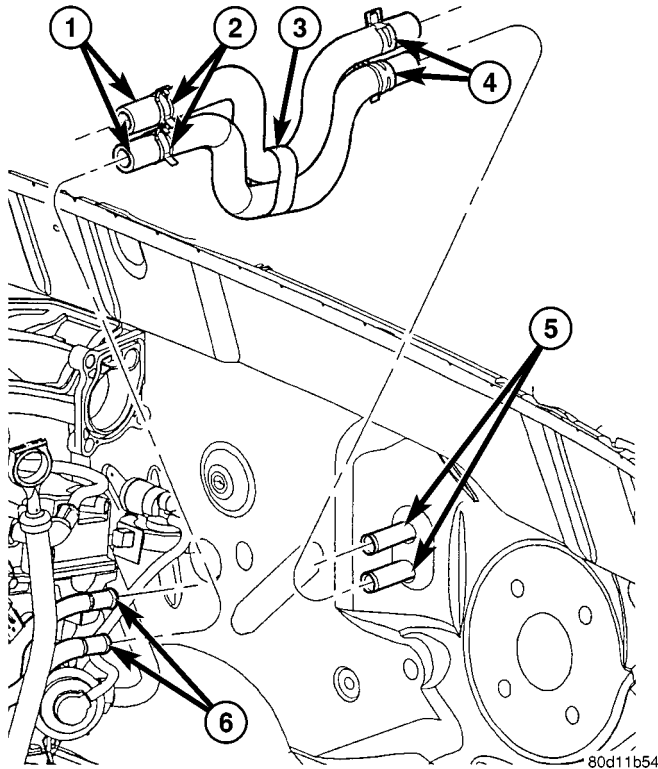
Heater Hose Assembly- LHD 2.0L Shown, RHD Typical
